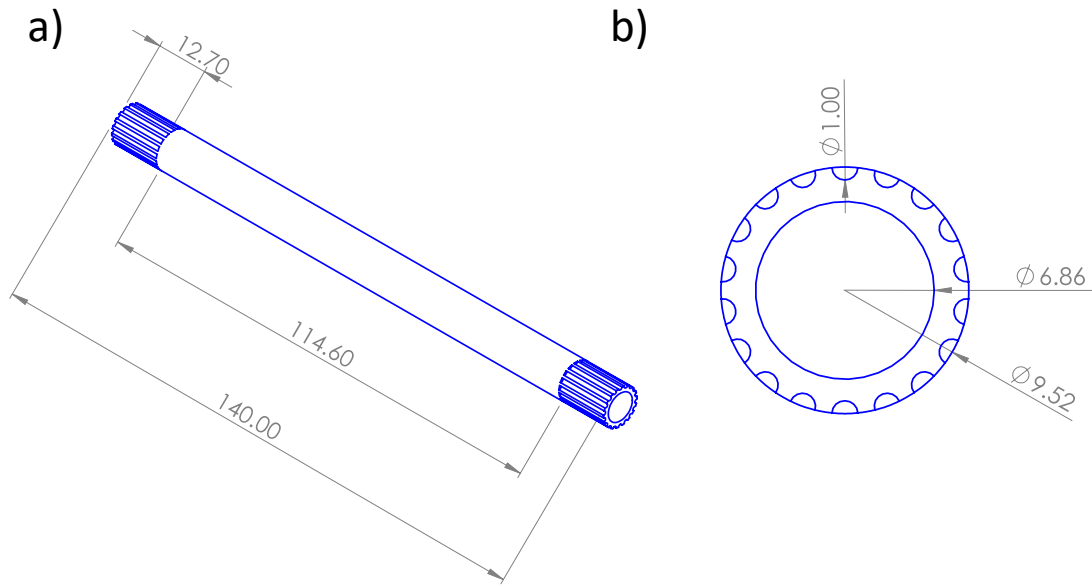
Technical drawing of thin torque tubes used in this study.
